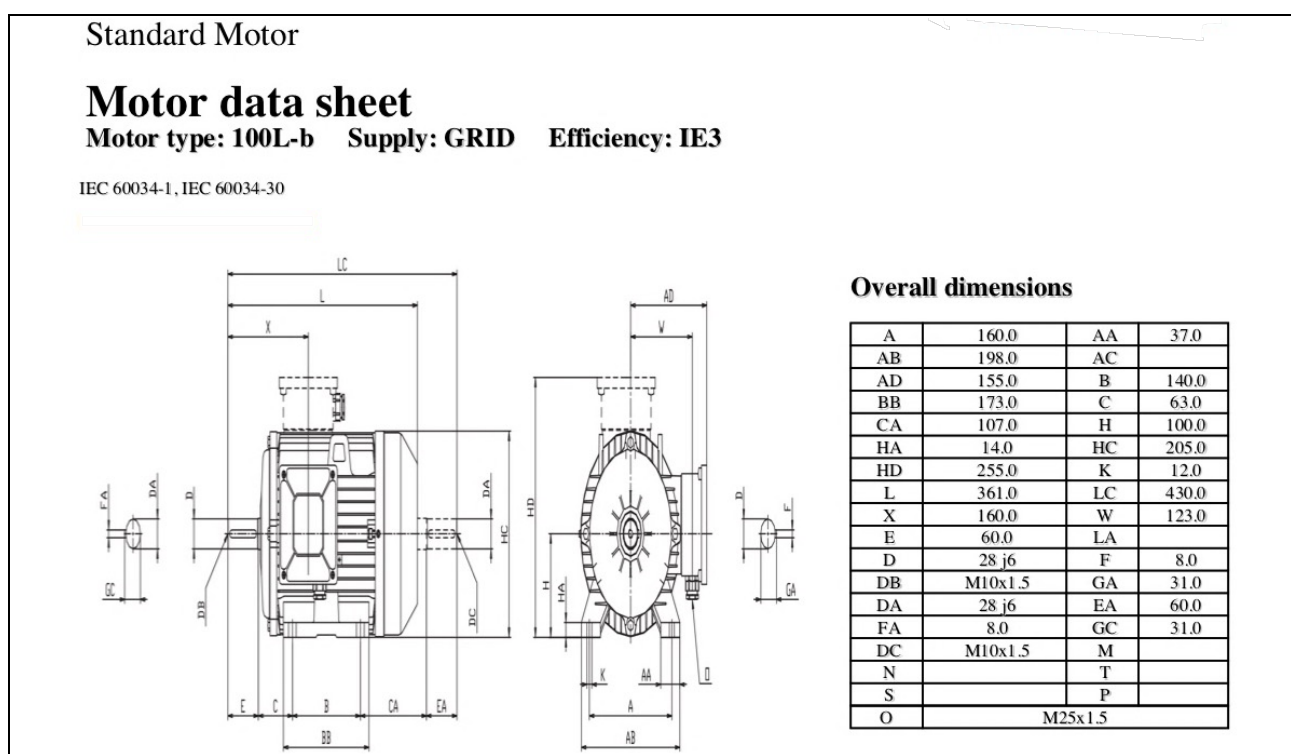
Figure to show an example of a 2D drawing from the downloadable configurator technical sheet and its overall dimensions
